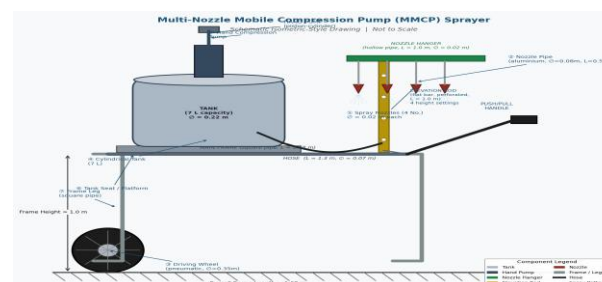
Schematic drawing of the Multi-Nozzle Mobile Compression Pump (MMCP)
